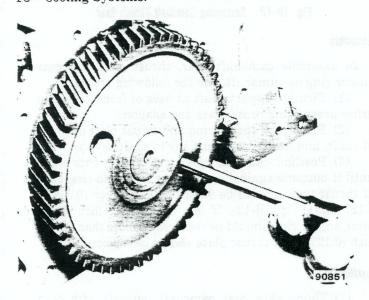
Removing Camshaft Thrust Plate Screws
